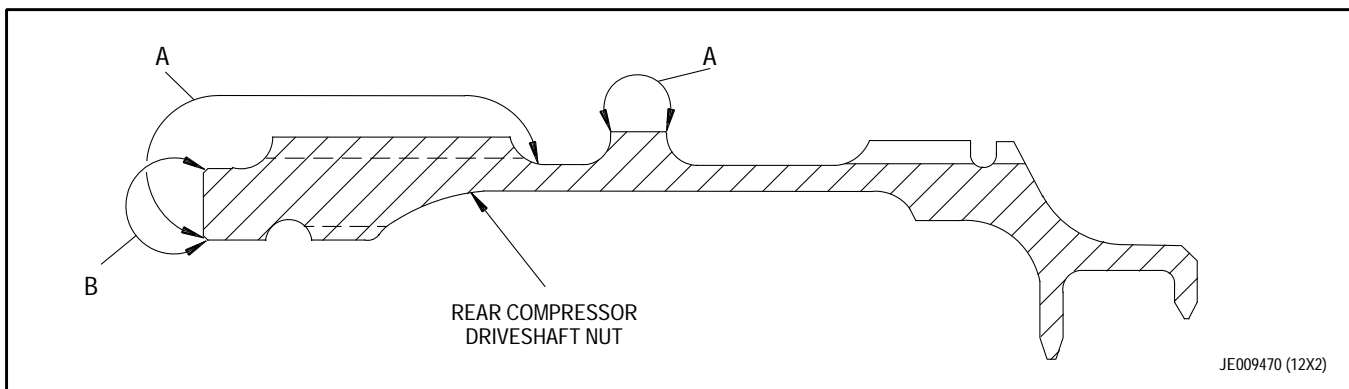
A. Rear Compressor Driveshaft Nut - Application of PWA 36545 Antigalling Compound
